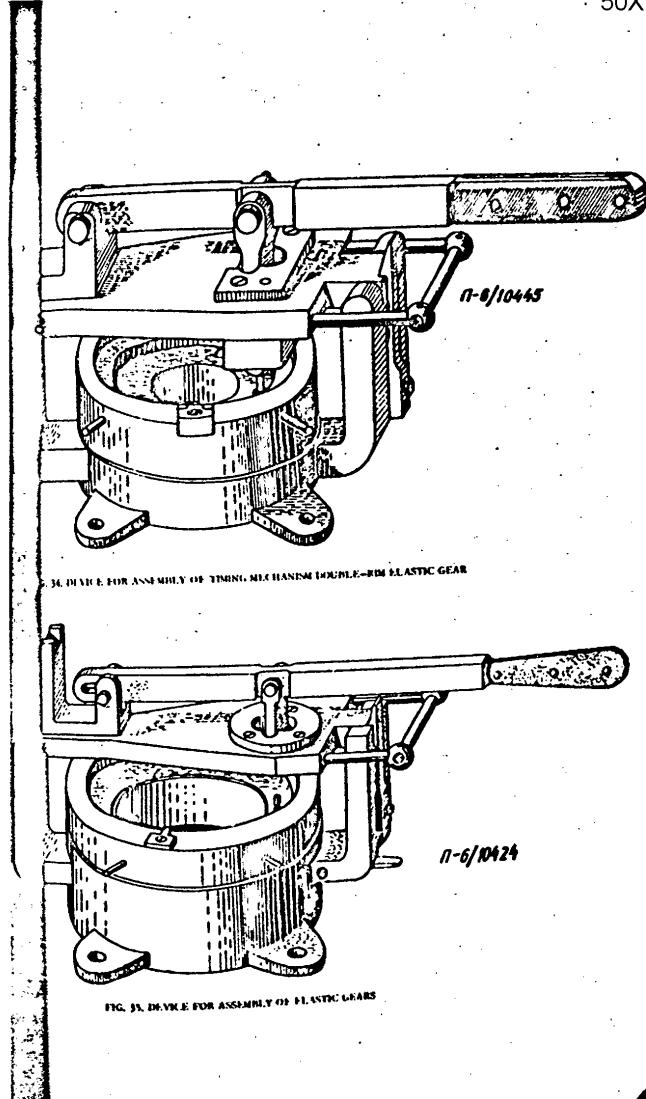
DEVICE FOR ASSEMBLY OF PLASTIC GEARS
